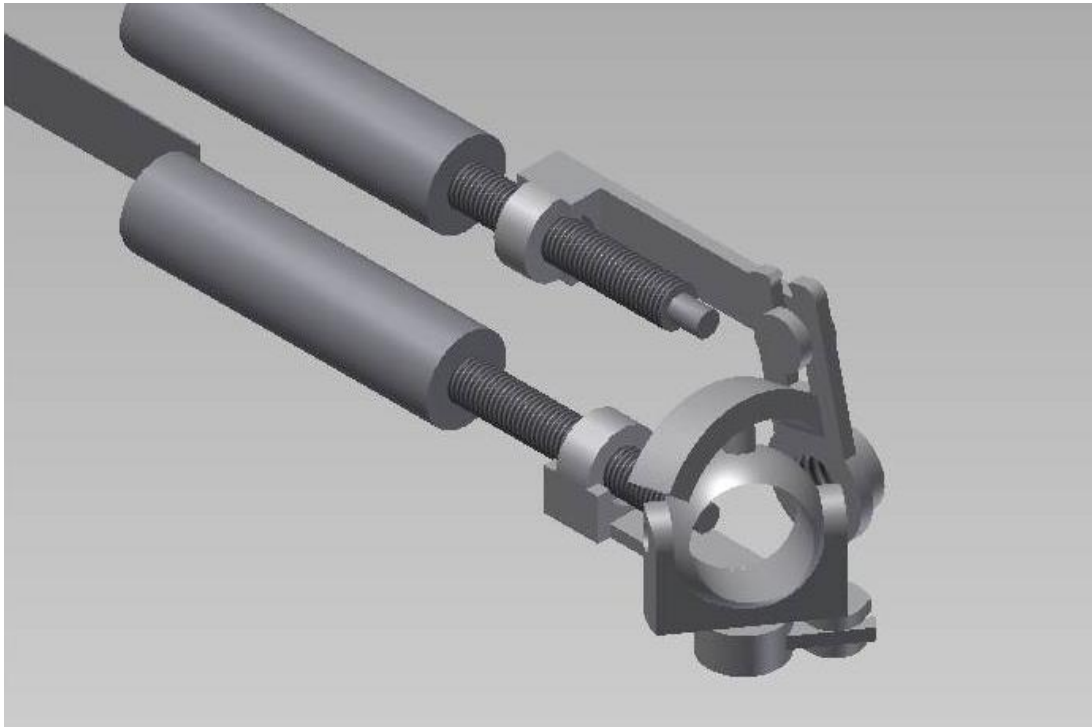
In Mk2, the motor linkage to the four part mechanism does not use rivets or screws.
